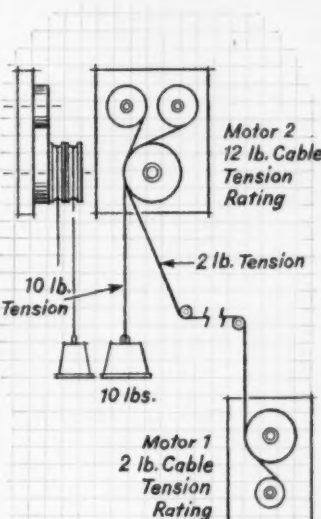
Two NEG'ATOR Motors can be used to make an inexpensive but practical servo mechanism as illustrated by this diagram. Motor 1 with a 2 lb. cable tension is used as a manually operated actuator. Motor 2 is connected to Motor 1 by means of a common cable, or cord, which runs from the output spool of one motor to the output spool of the other motor. Motor 2, at a remote location, provides a 12 lb. load, 10 lbs. of which support the 10 lb. load while the other 2 lbs. balance Motor 1. Friction keeps the system static until Motor 1 is manipulated. When Motor 1 is operated in either direction, Motor 2 follows. If the only "load" on Motor 2 is an indicating function, both motors can have equal cable tension.
